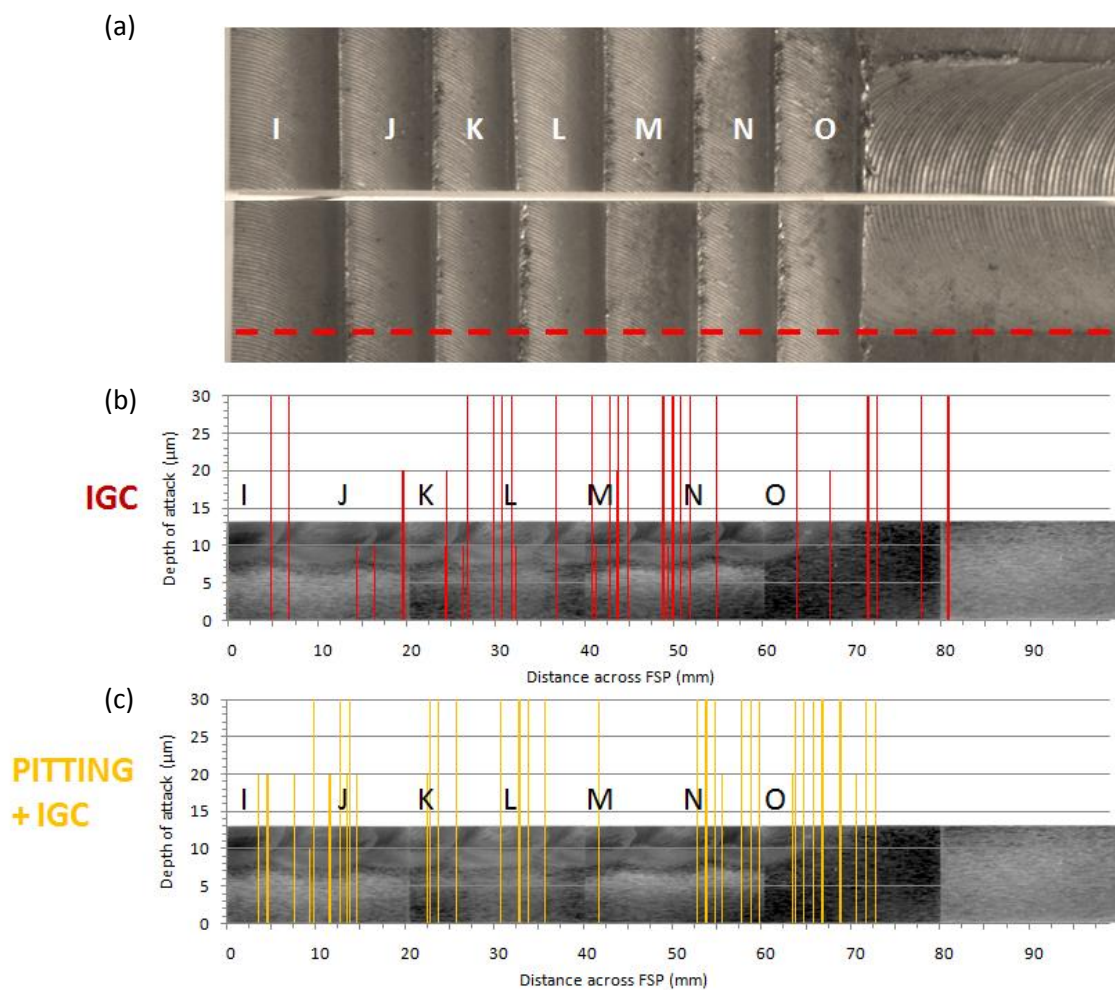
A series of optical macrographs showing the locations and depths of attack for; (a) the HAZ of the FSW and the retreating side of the hot FSP for (b) IGC attack, and (c) pitting with IGC attack
